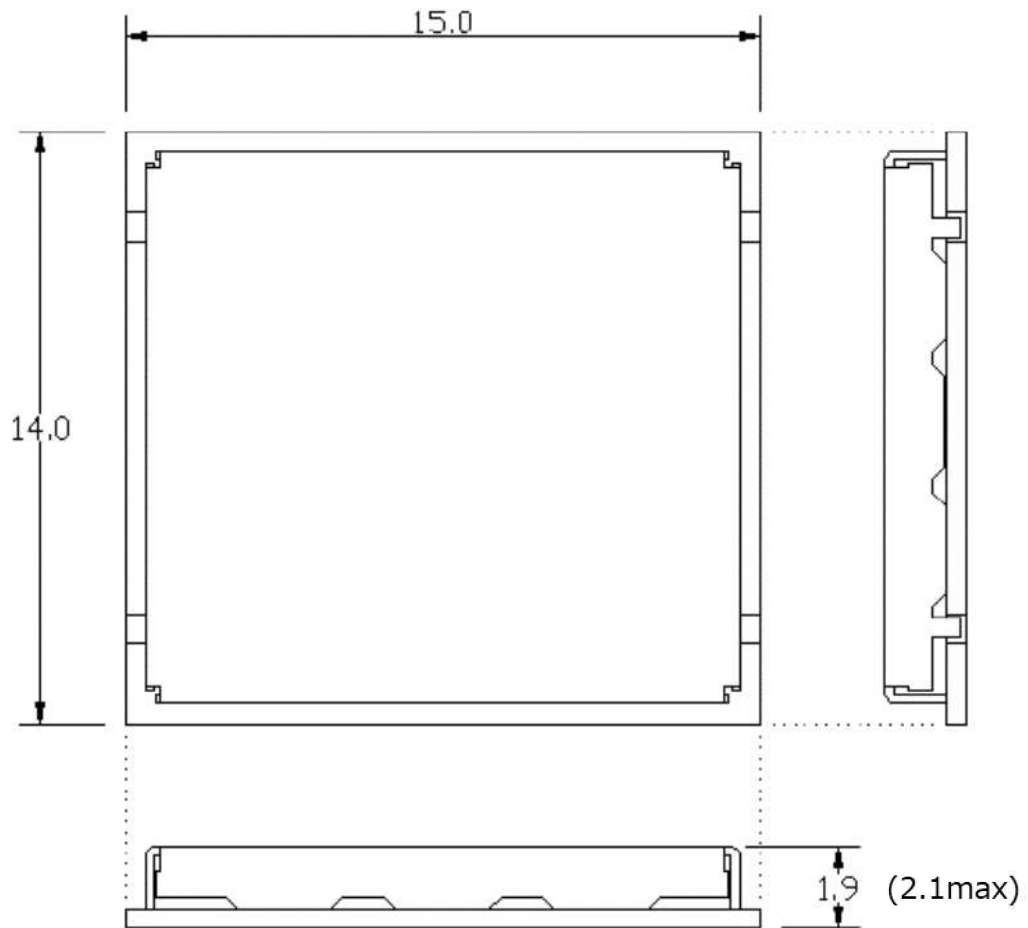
dimensions of the module (TOP VIEW) (unit: mm)
